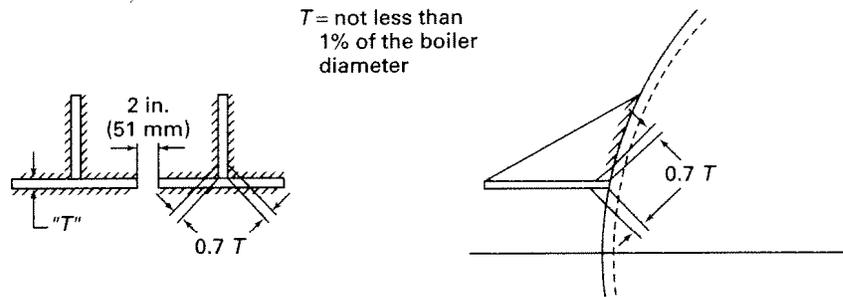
(b) WELDED BRACKET CONNECTION FOR HORIZONTAL-RETURN TUBULAR BOILER
